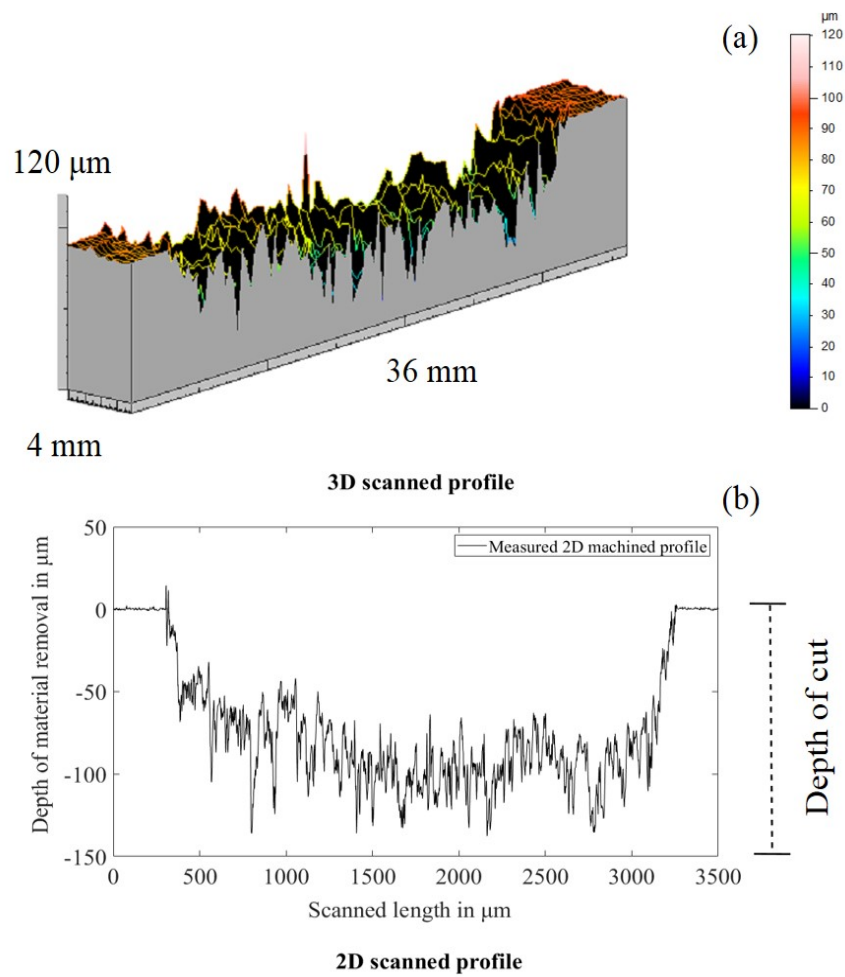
(a) 3D profile extracted from the workpiece surface across the machined surface using Taly-scan; (b) 2D profile obtained from the workpiece surface across the grinded path to measure the depth of cut.
